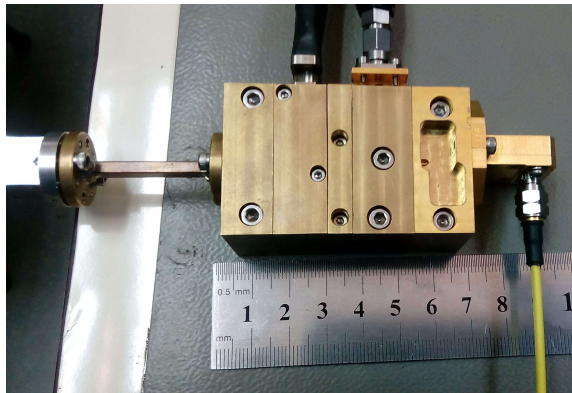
Single pixeler prototype module assembled with the components previously designed.
